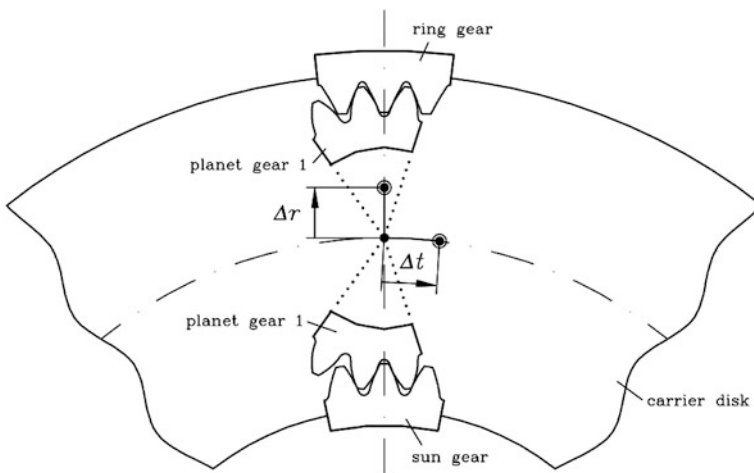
Assembly errors Δt and Δr of planet gear 1 on the carrier
